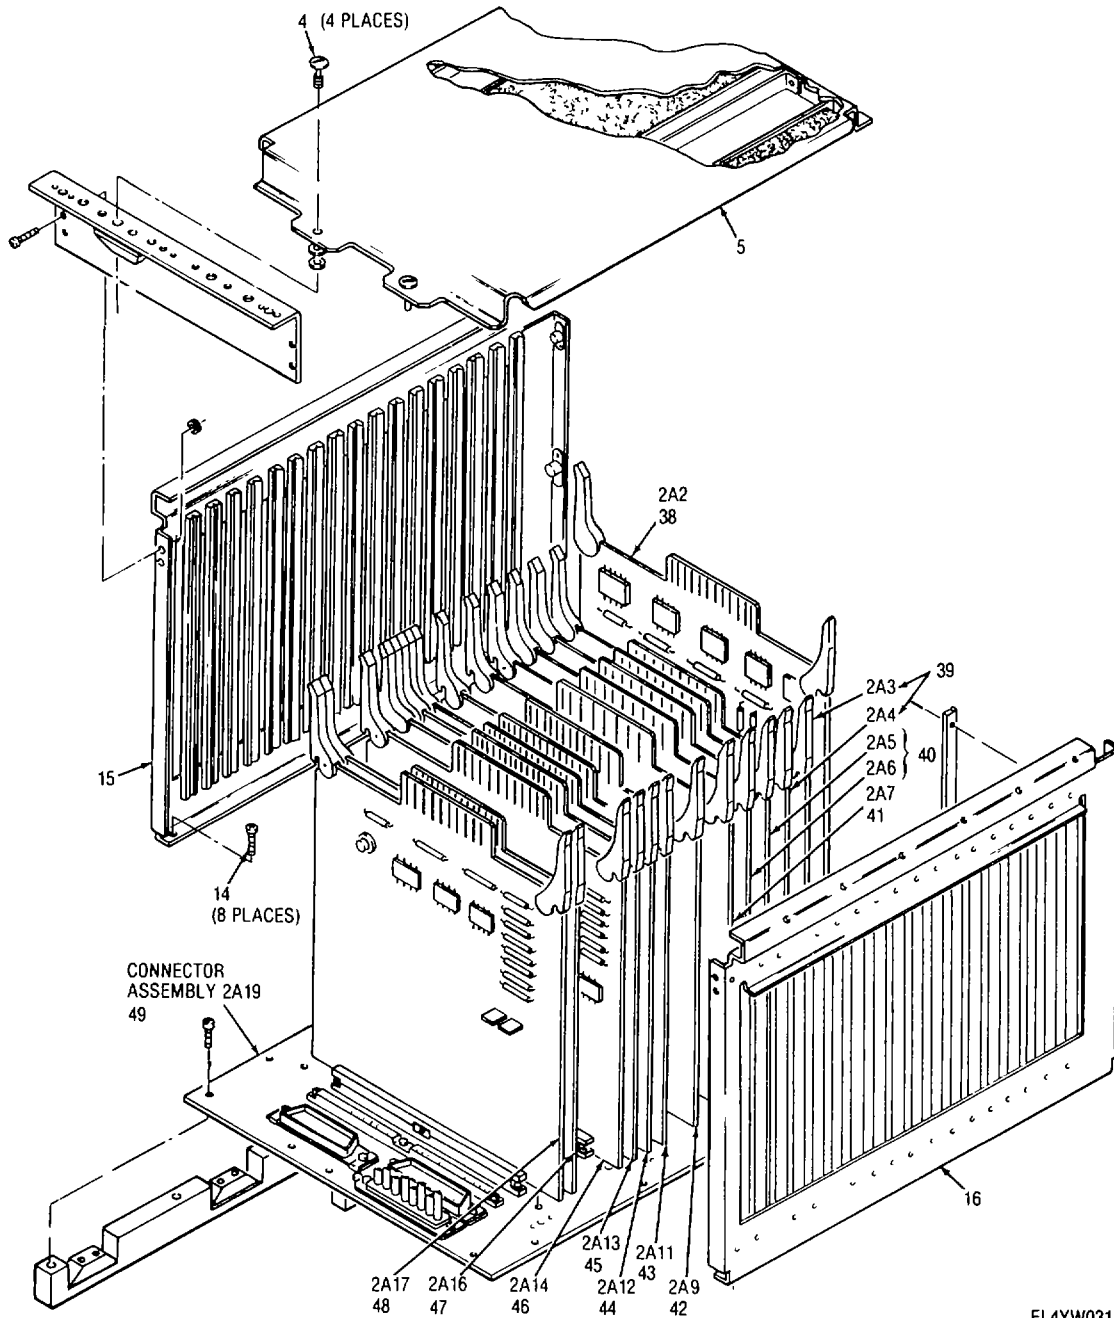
Encoder exploded view (sheet 3 of 8).
